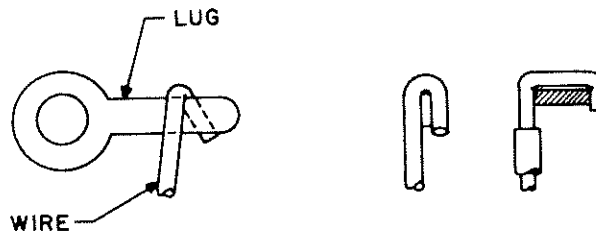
Wrap for Wire Size No. 26 or Larger on a Lug with No Hole
